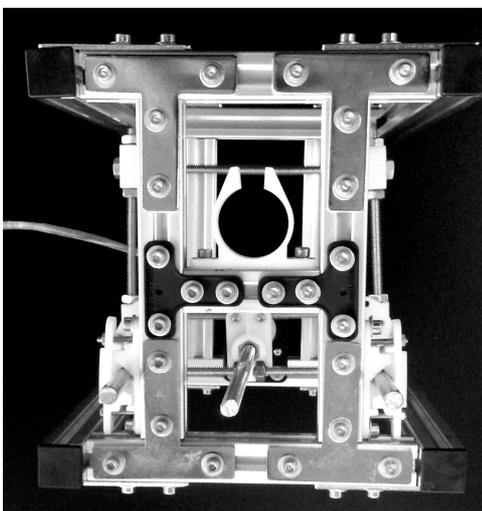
Assembly of Shaft Clamps. Adopted from OpenLabTools
